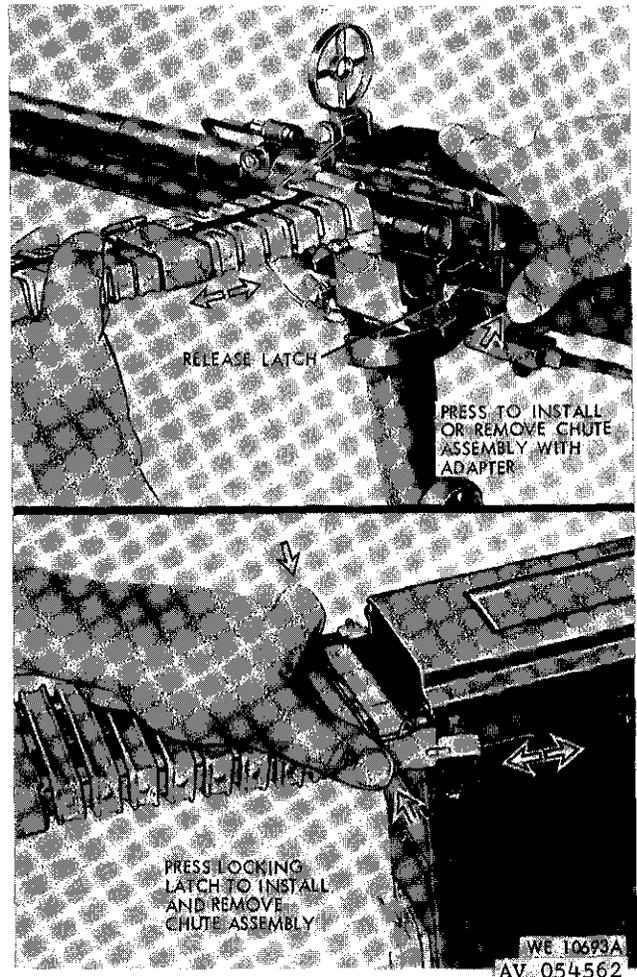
Installation or removal of chute assembly on machine gun M60D and ammunition box and cover assembly
